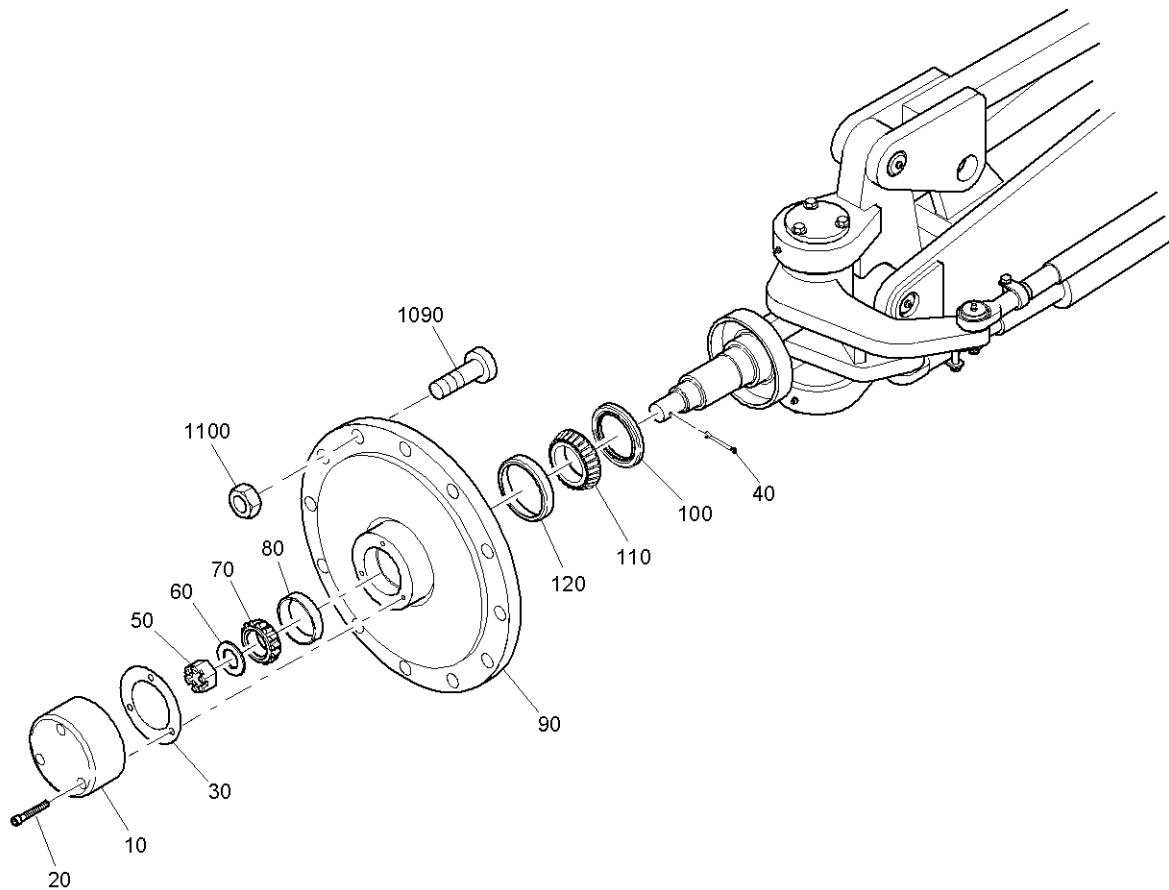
FRONT AXLE ASSEMBLY (SHEET 1 OF 6)
